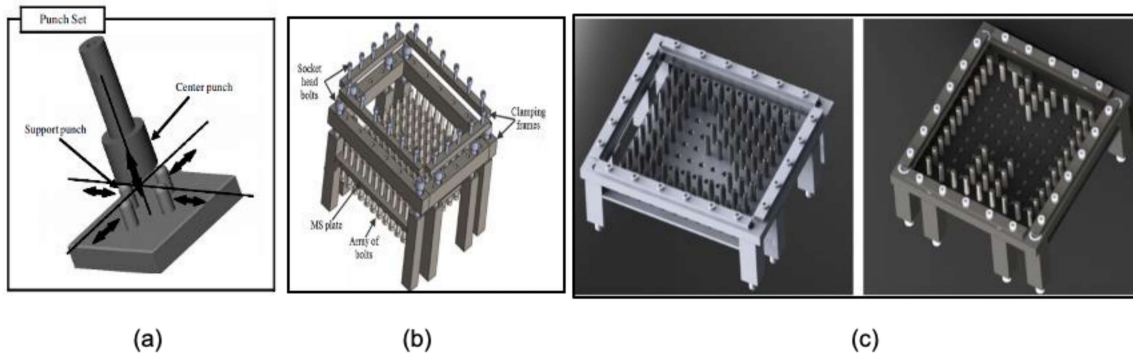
(a) Punch set with counter punch used by Yoon and Yang [29] and (b) FBS system (c) FBS system with removed bolts for making L and M shapes [31].
